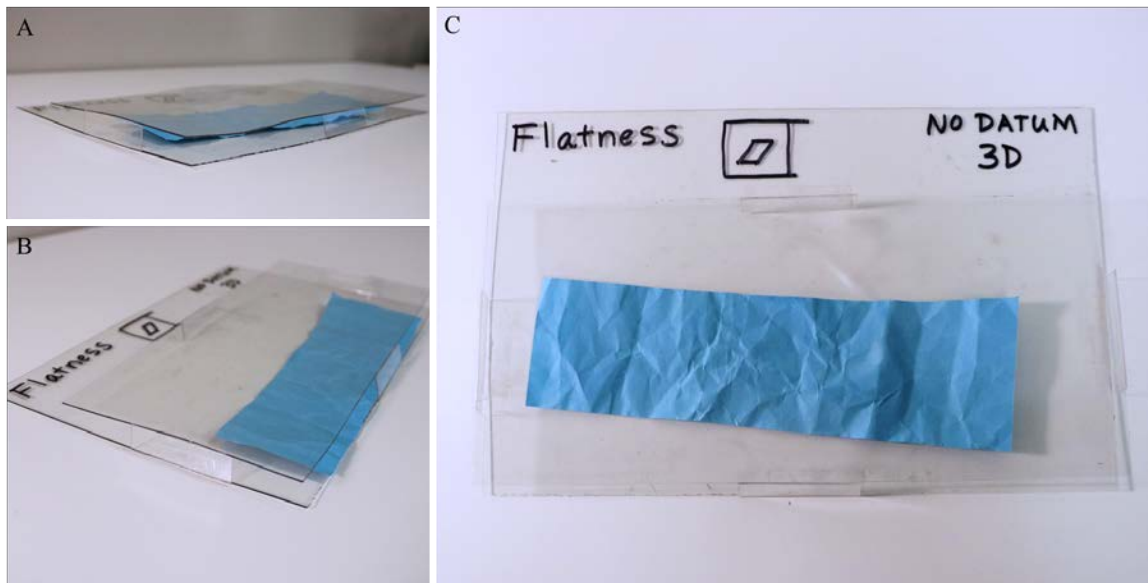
GD&T Spatial Learning Tool for Flatness Tolerance
